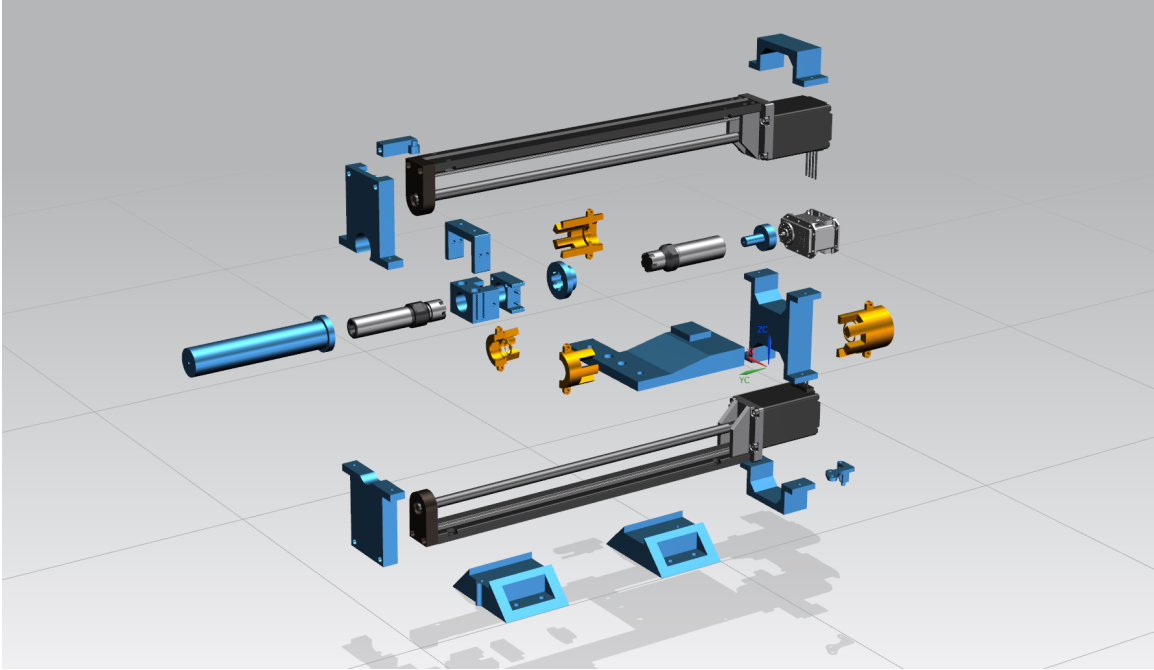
Exploded-view drawing of the CAD model for main structure of the needle insertion system.
